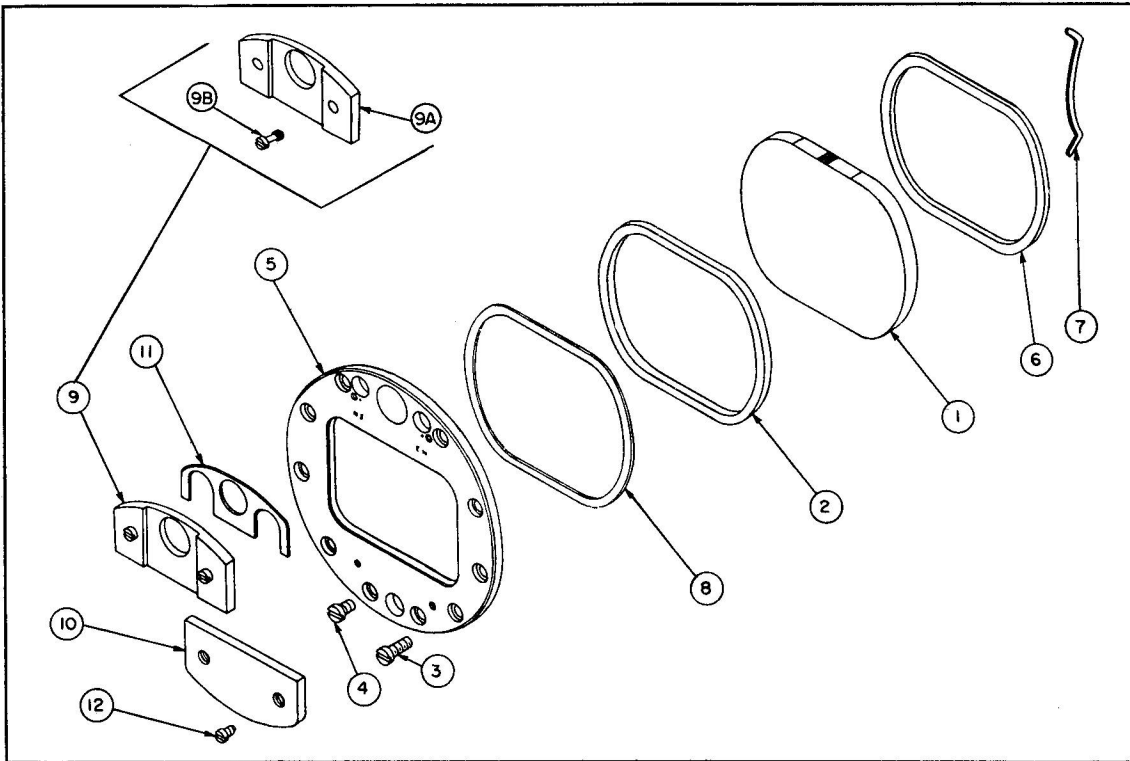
Exploded View - Compass - Bezel and Attaching Parts - Type B-16,
